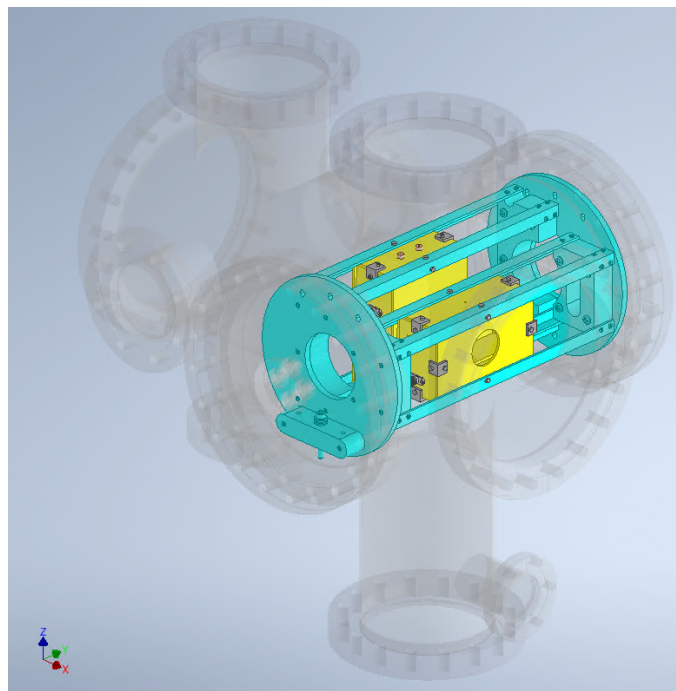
View of the vacuum chamber with the MW spectrometer unit installed.
